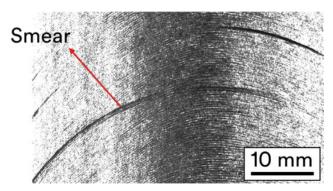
Image of a stainless steel workpiece containing multiple smear defects.
